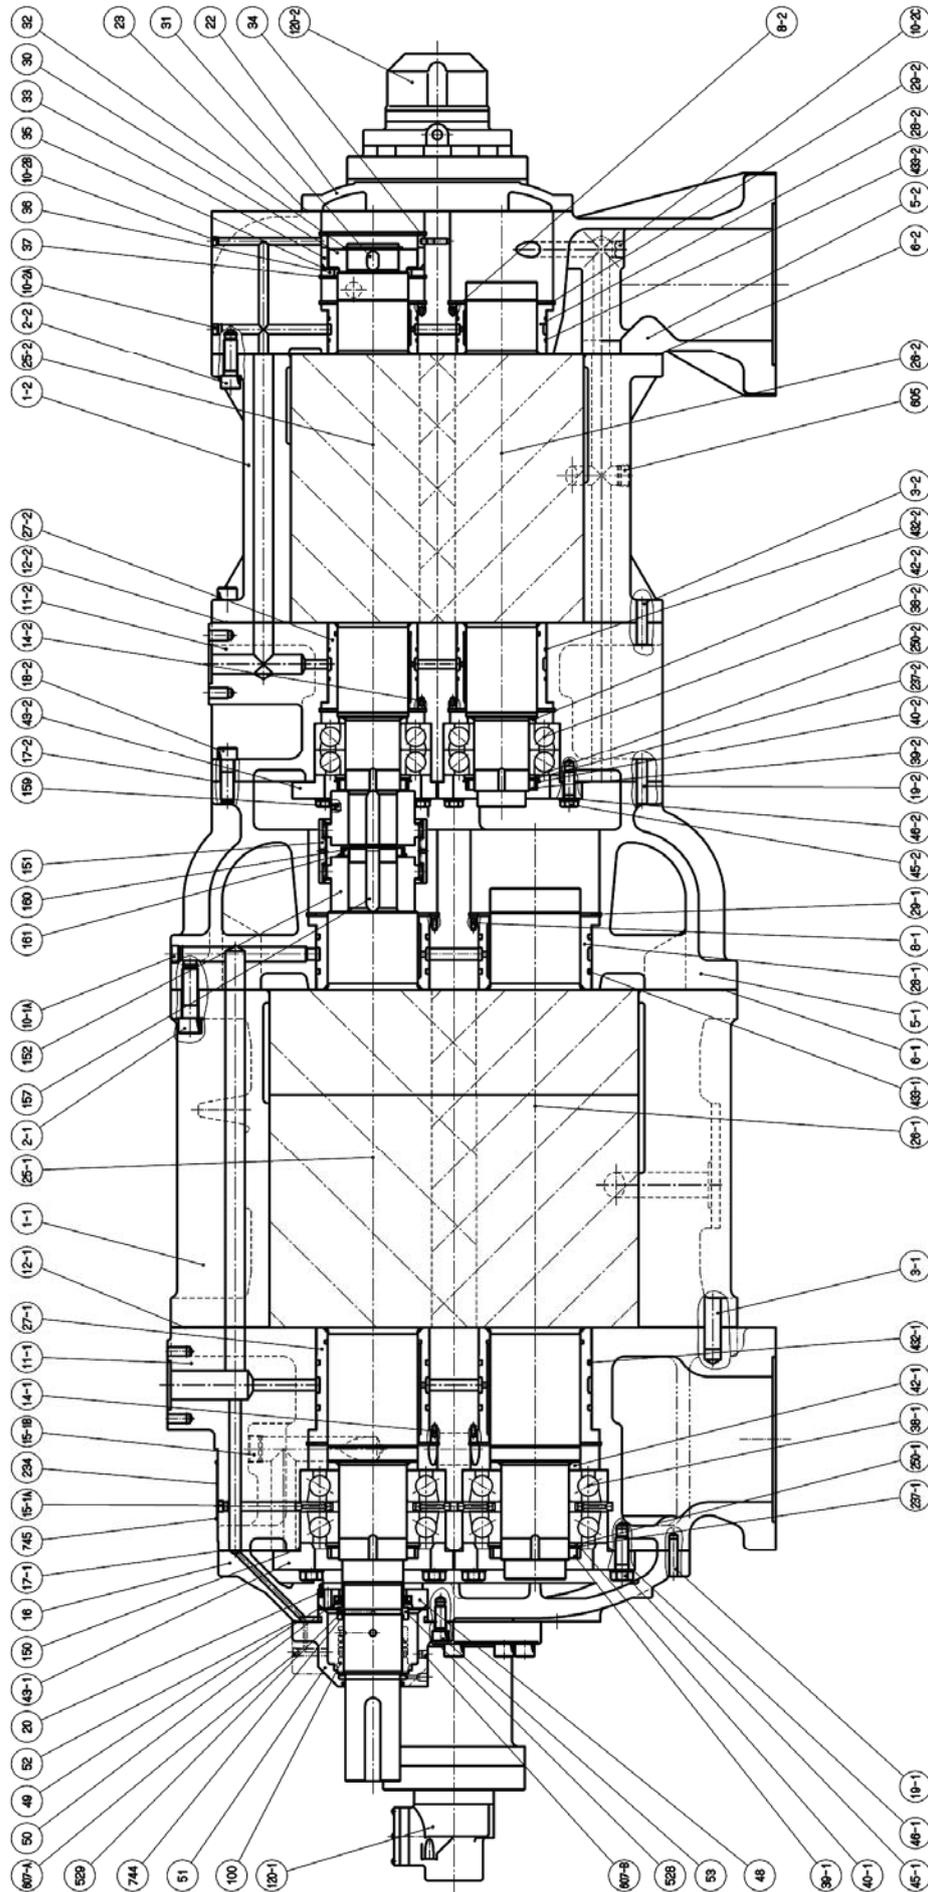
3225LLC Assembly Sectional View (Horizontal)
